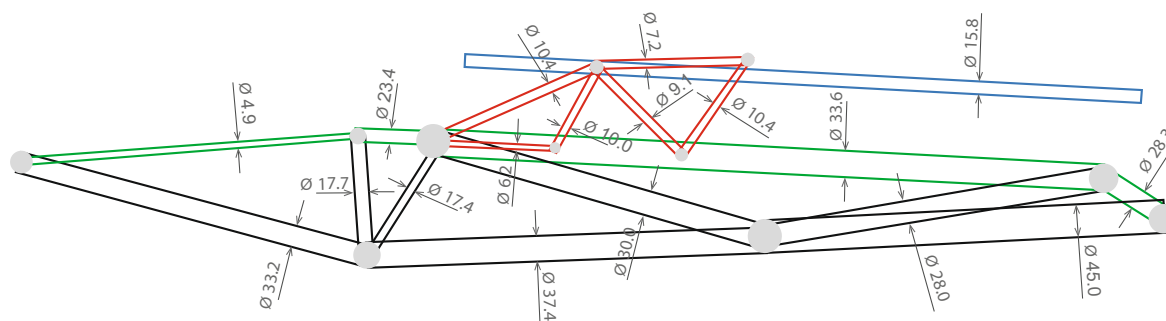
Modeled and sized VFW-614 outboard hooked-track (dimensions in mm)
